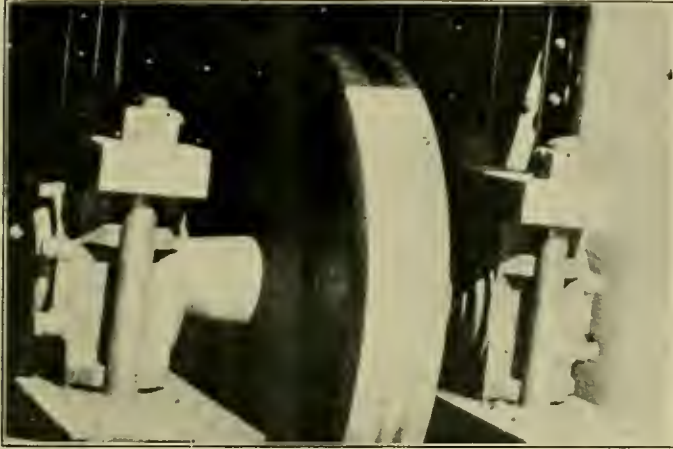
Close-Up of One of the Truck Wheels Showing the Method of Mounting the Roller Bearings
